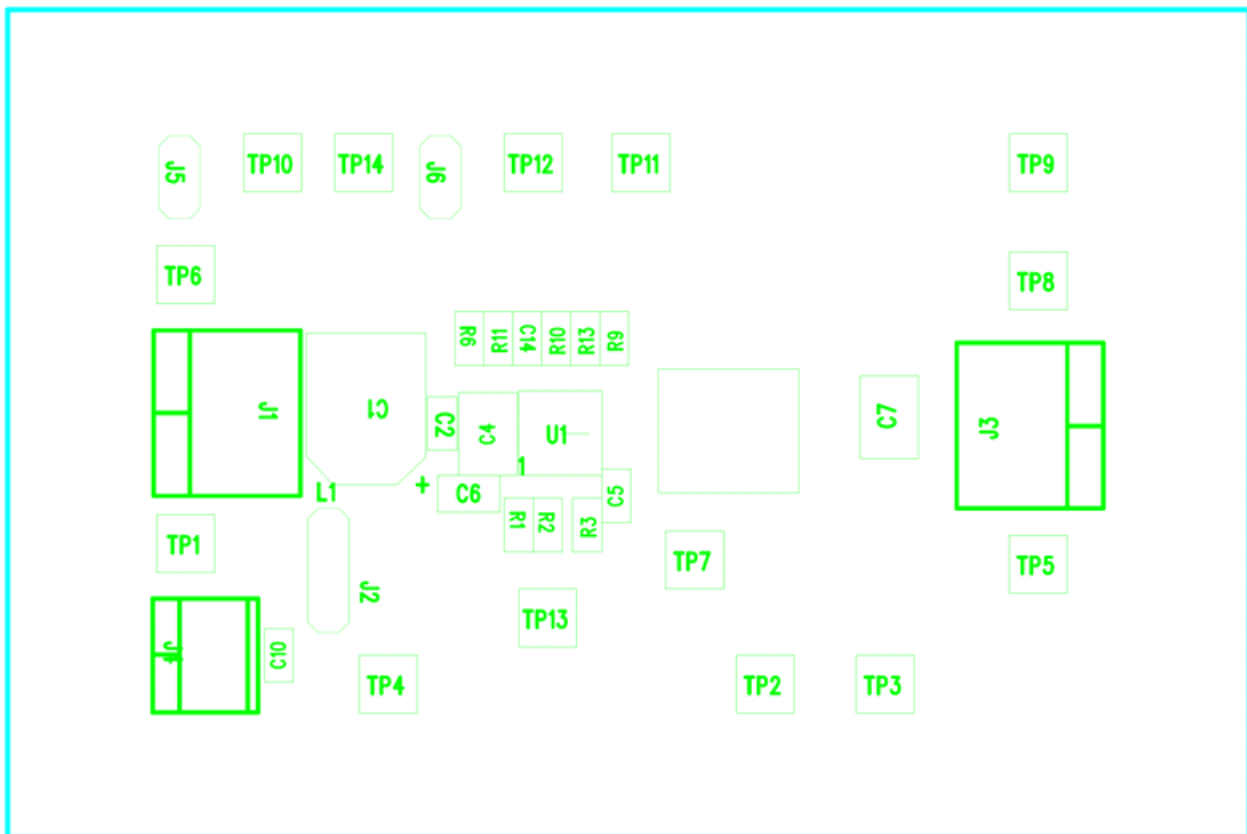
TPS54020EVM-082 Top Side Component Placement
